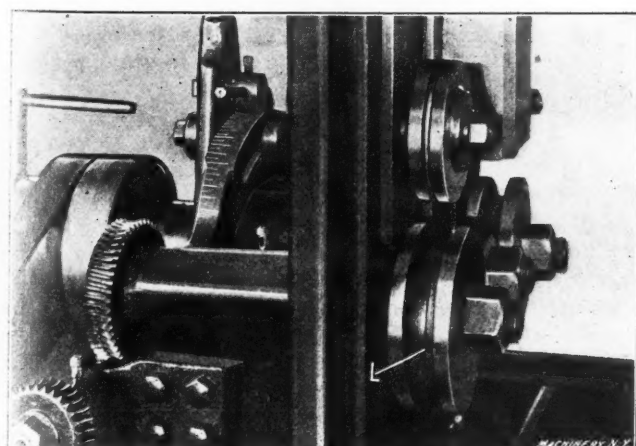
Detail View showing Feeding Guide-rolls of Spline Miller
